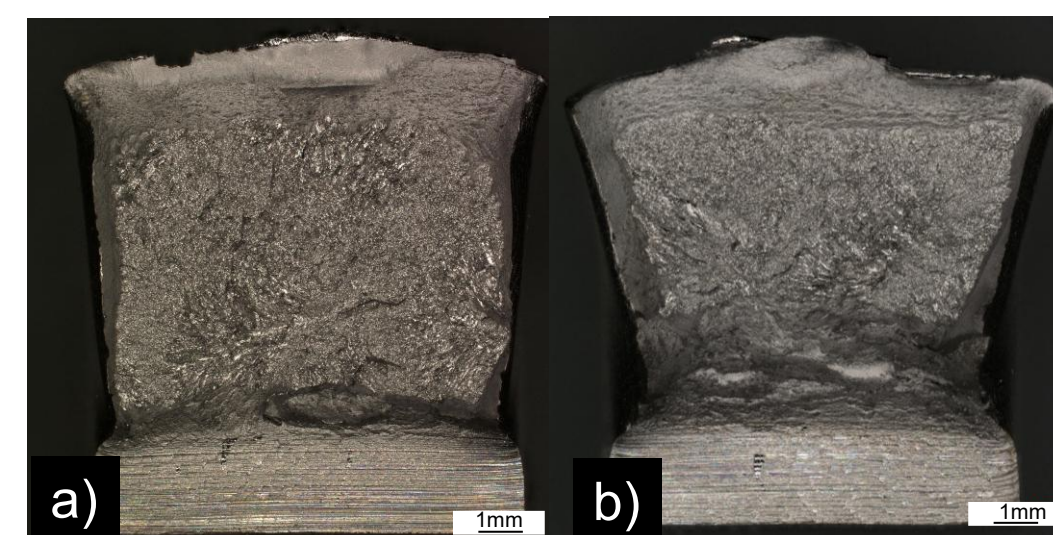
Fracture surfaces a) Red set 1 b) Red Set 2.
